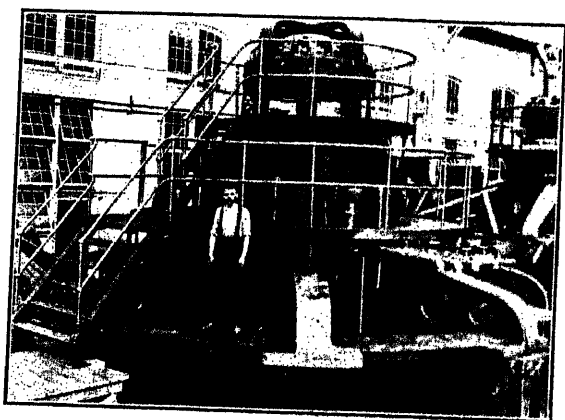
UPPER BRACKET WITH THRUST BEARING, EXCITER, PLATFORM AND STAIRWAY ASSEMBLED
